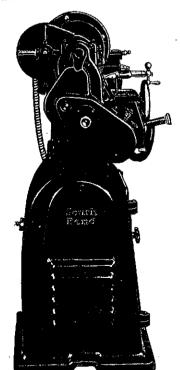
End view of Underneath Belt Motor Driven Lathe, showing removable ventilated end plate
